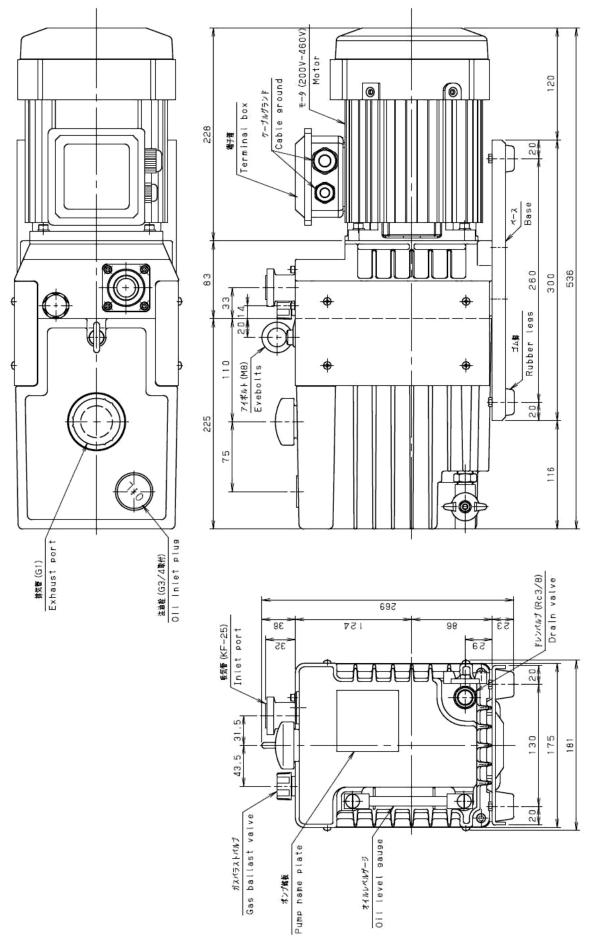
Dimensional drawing of GLD-280A oil sealed rotary vacuum pump
